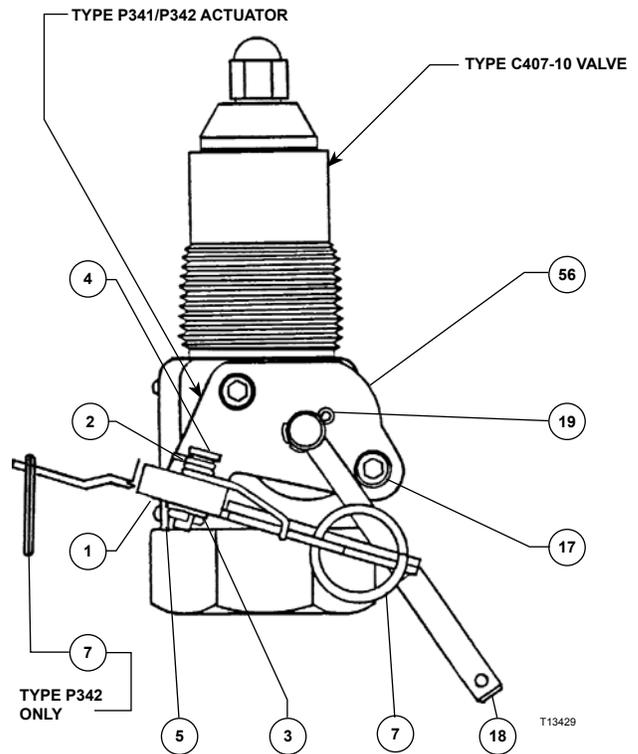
Type P341 or P342 Installed in Type C407-10 Internal Valve
